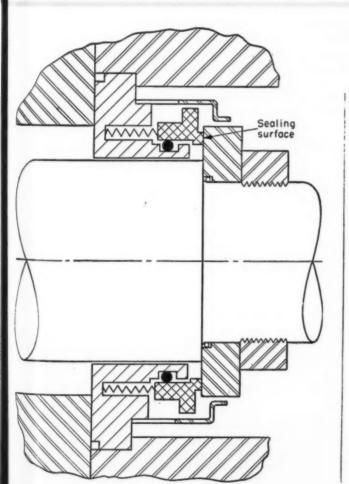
Left — Dry contact seal. Mating pressures are spring controlled. Non-rotating seal ring is free to float in both the radial and axial directions
